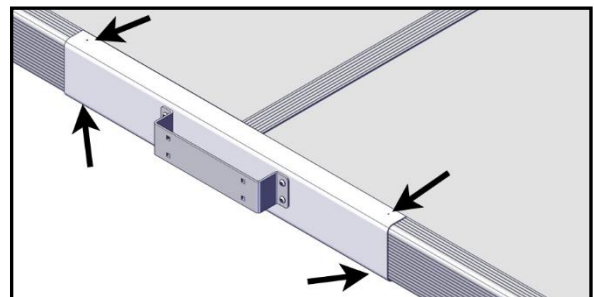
LOCATION OF THE DRILLING HOLES (4) IN THE SHORT SUPPORT BRACKET
